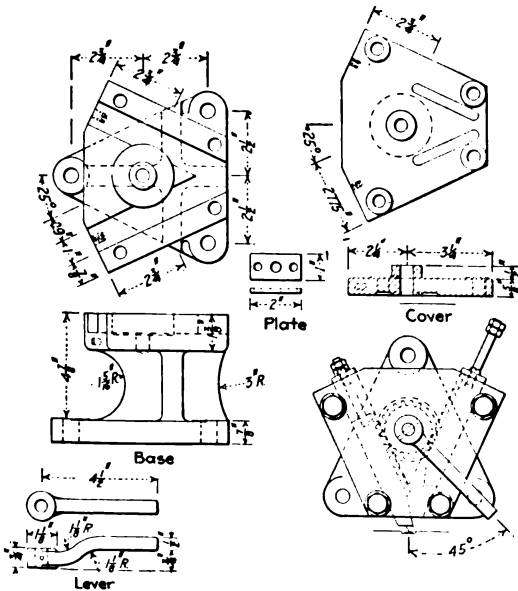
DETAILS OF THE DOVETAILED TOOL
